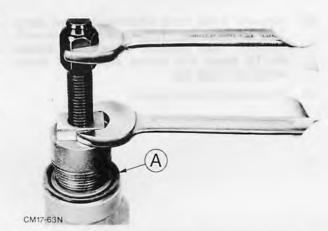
Remove extension housing oil seal, holding tool with an open ended spanner
